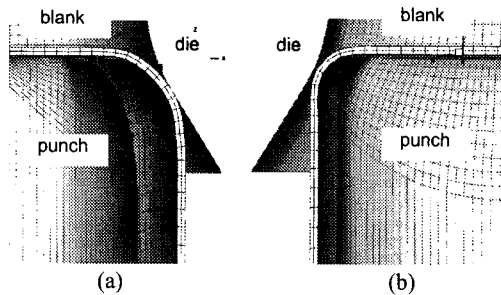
Initial shape of tool positioning at the stage 4 with the modified design: (a) minor axis; (b) major axis
